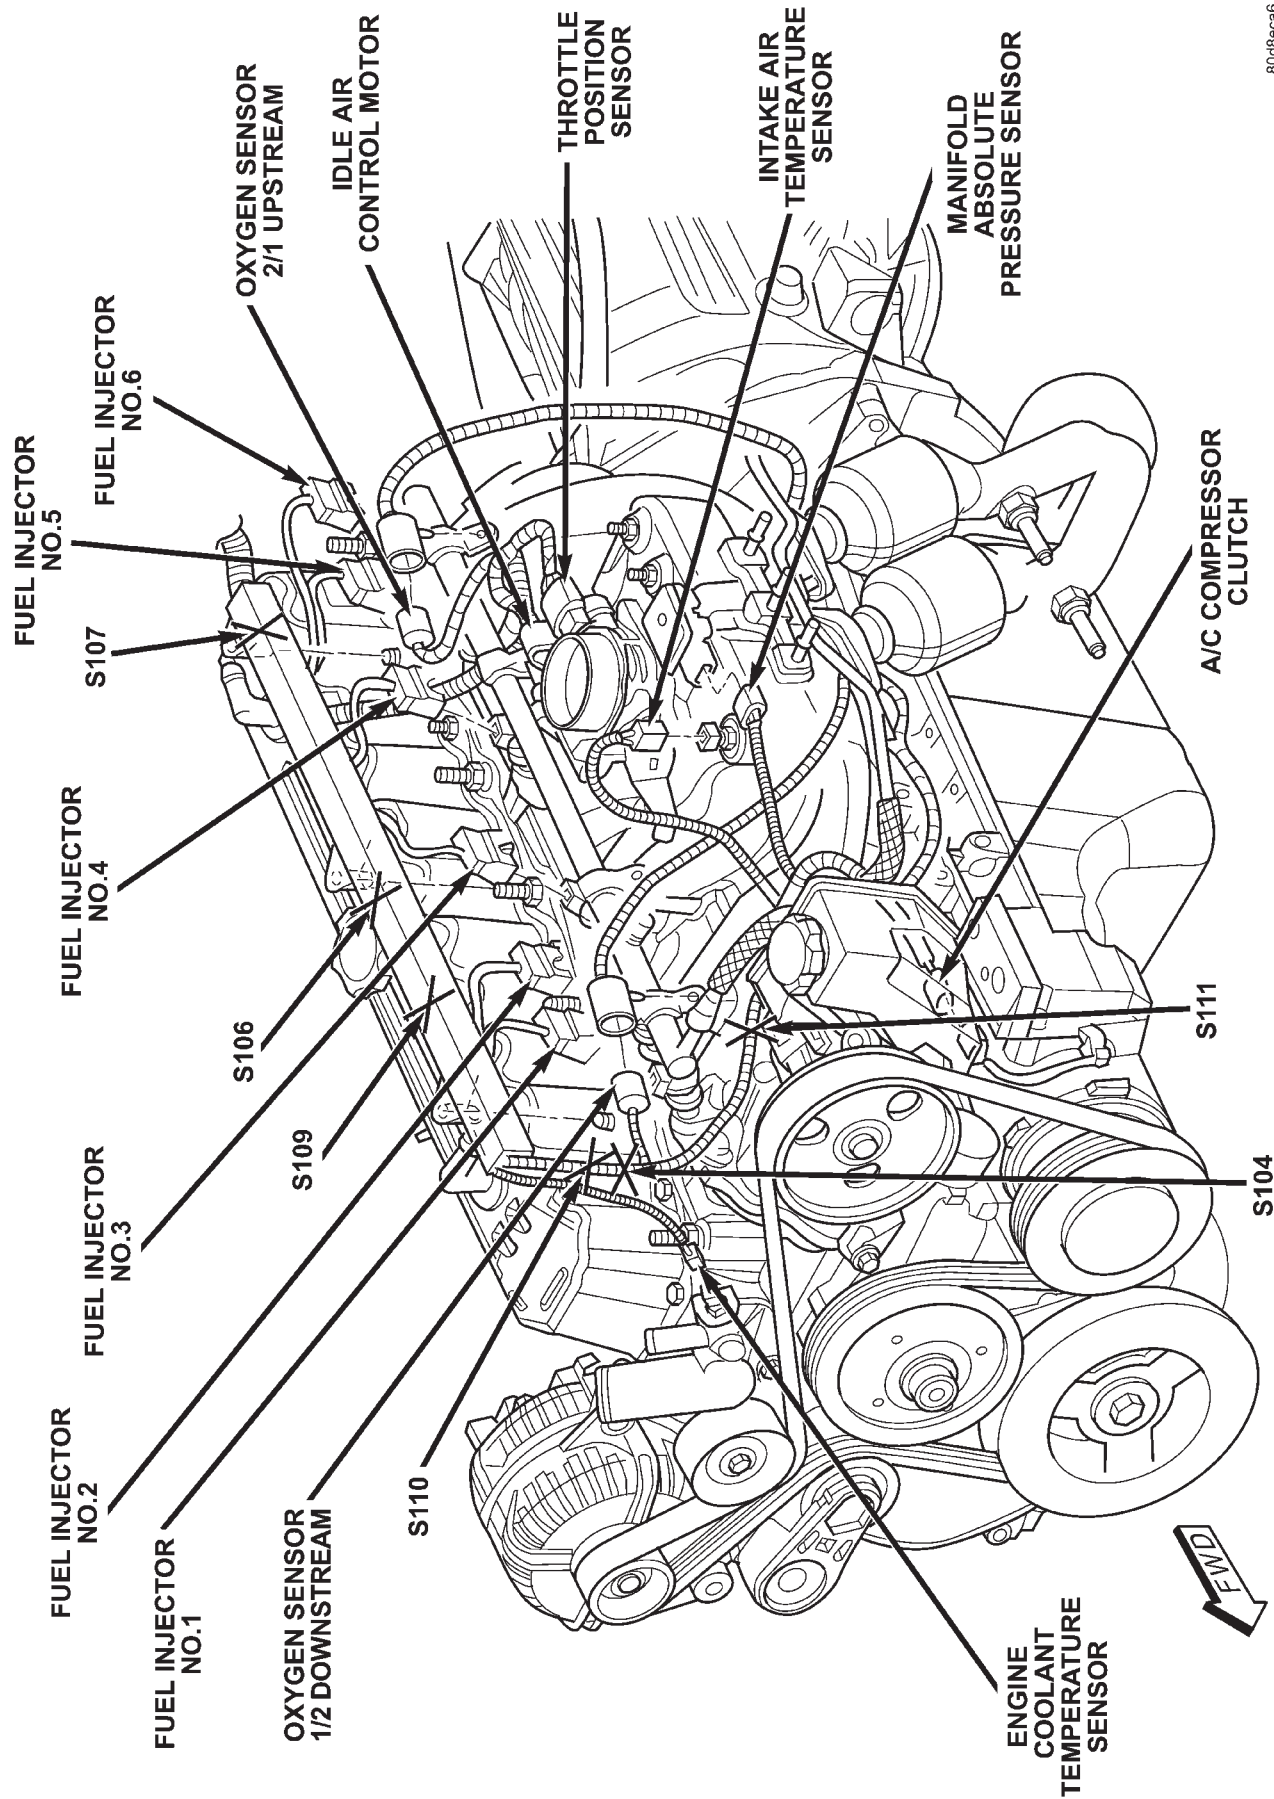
2.7 LITER DIESEL ENGINE RIGHT SIDE
